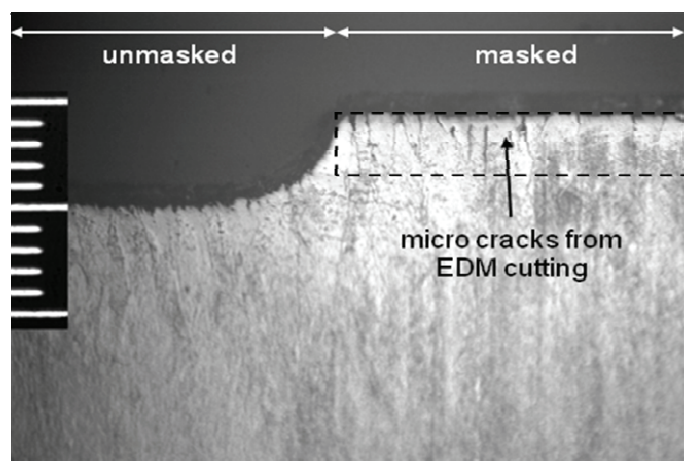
S-ECM processing of a tungsten disc with half masked surface for comparison purpose. Right side masked and thus unprocessed; left side S-ECM machined with a removal of 60 μm .
